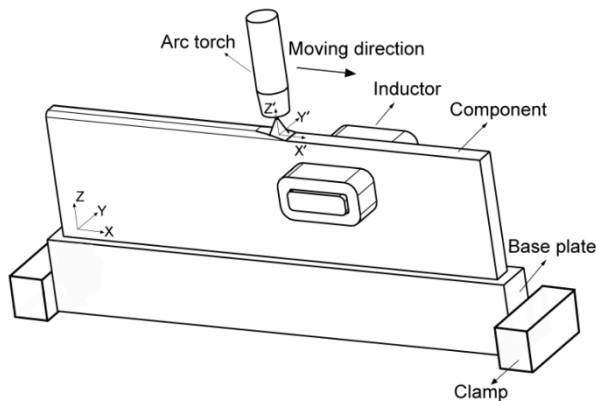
Induction pre-heating ahead of the weld pool [128].
